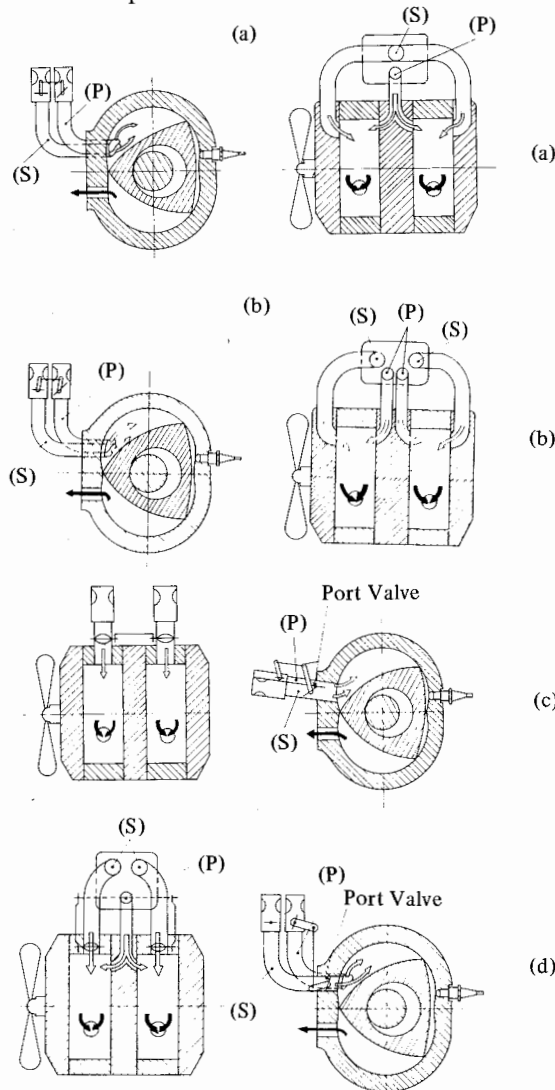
Intake and exhaust flow for two-rotor engine
